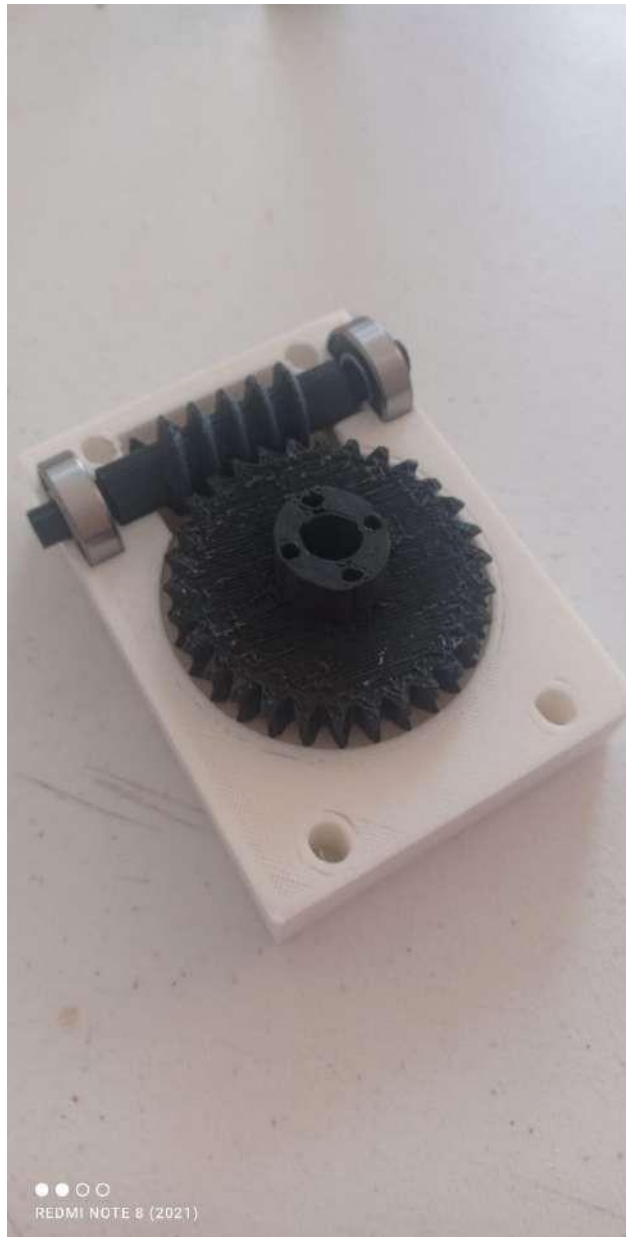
Worm-gear gearbox Assembly. Source: own
